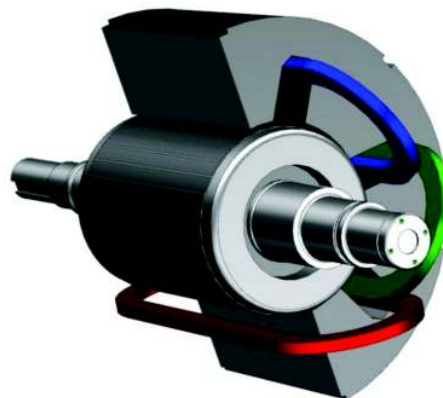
The 3D configuration of the windings and the rotor, winding end part.
